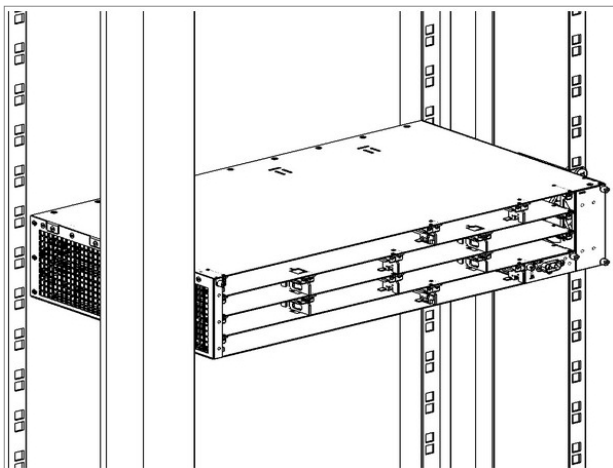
2RU IDU Chassis in Rack - Front Mount
